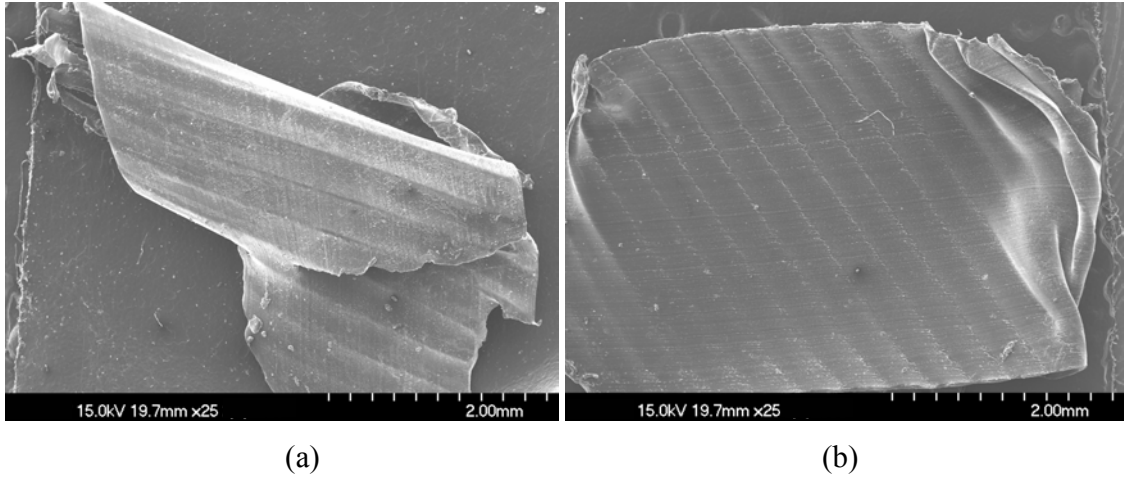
SEM micrographs: (a) a curled, serrated SCE type chip with wavy marks machined by Tool 8 in Experiment III, and (b) a SFE type of chip with the wavy serration mark on the surface.
